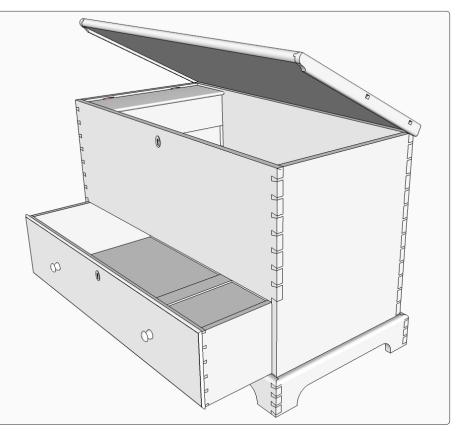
This Shaker blanket chest makes a good piece for practicing how to make dovetail joints in SketchUp.
